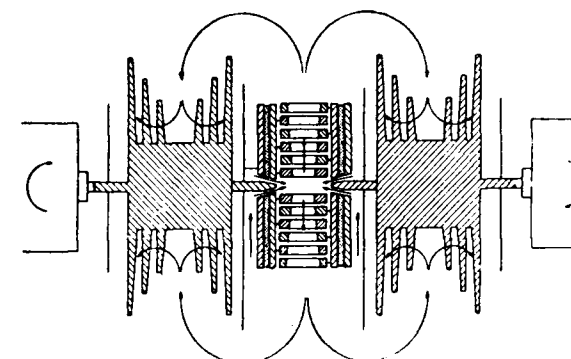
A Durax turbine with four outlets. (Fr 739)
